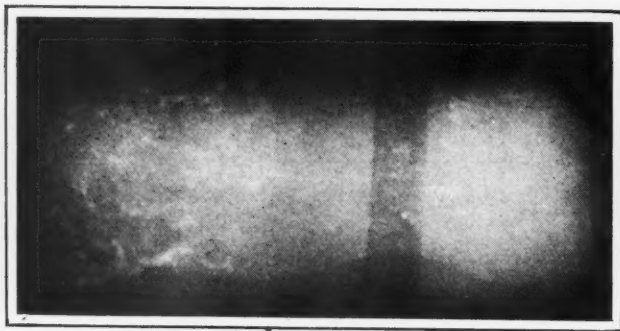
X-ray Picture of Cast-steel Tee Showing Shrinkage Cracks (Half Actual Size)
